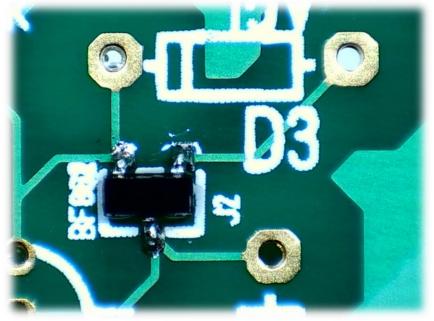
Soldering SMD FET completed (Rev06 picture)
